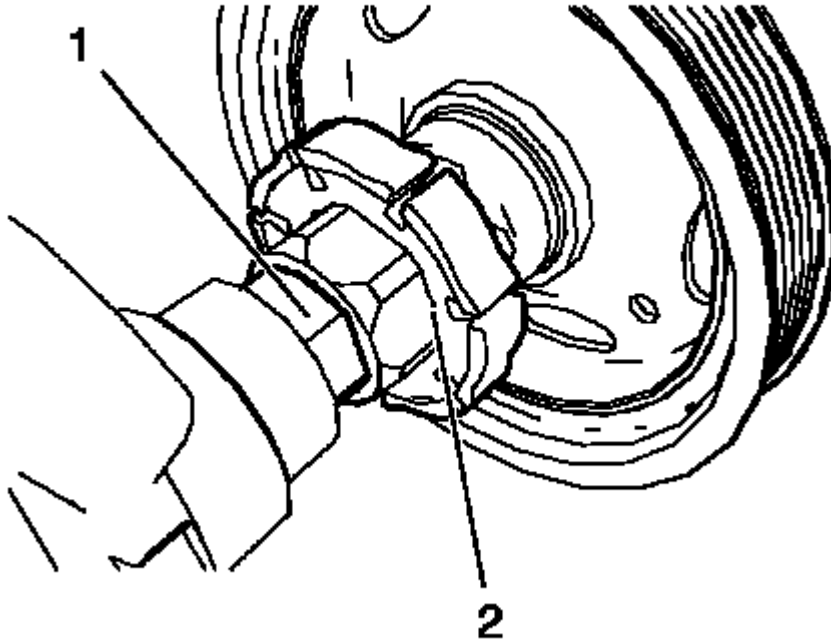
Engine Oil Pump Rotor And Crankshaft
